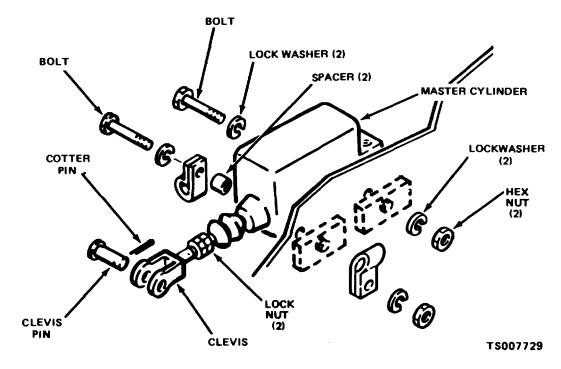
Service Brake Master Cylinder, Removal and Installation
